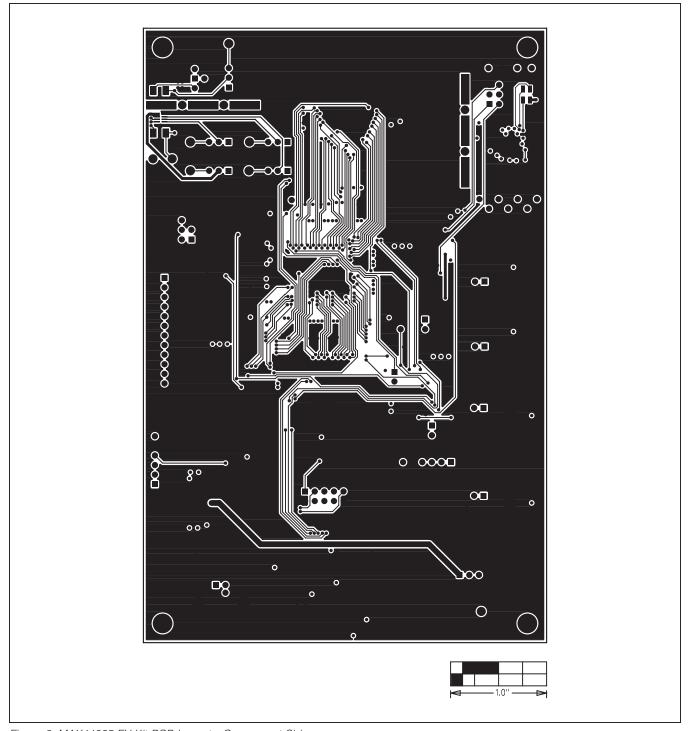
MAX44005 EV Kit PCB Layout—Component Side
